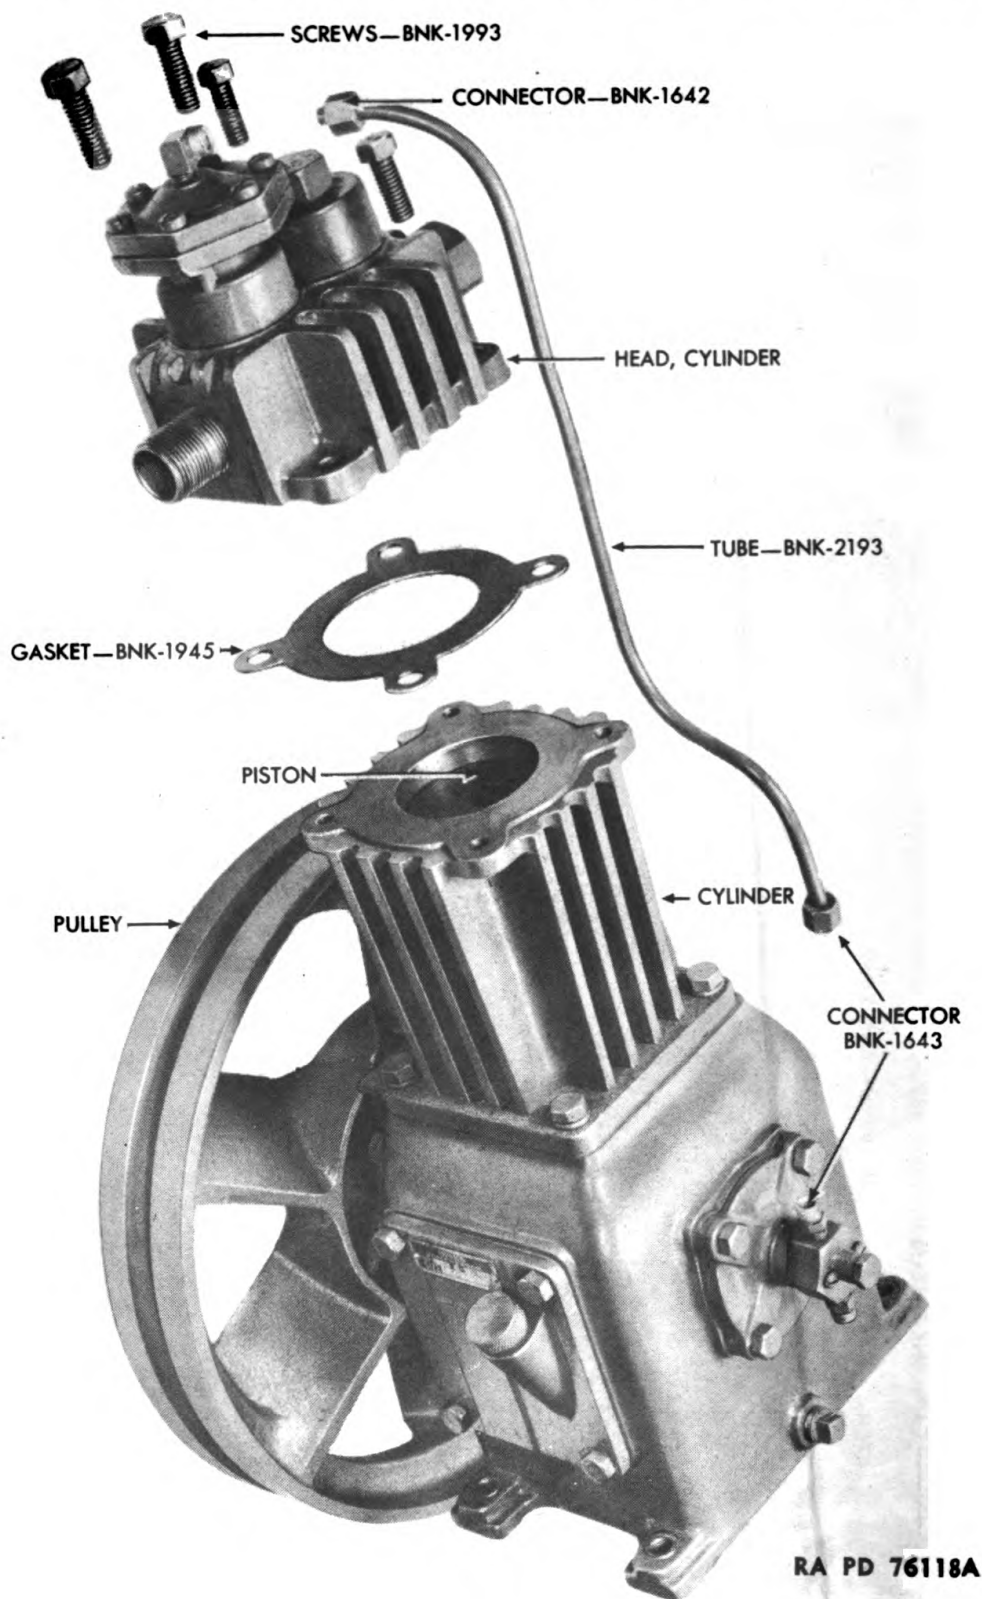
Air Compressor — Cylinder Head and Tube Removed
